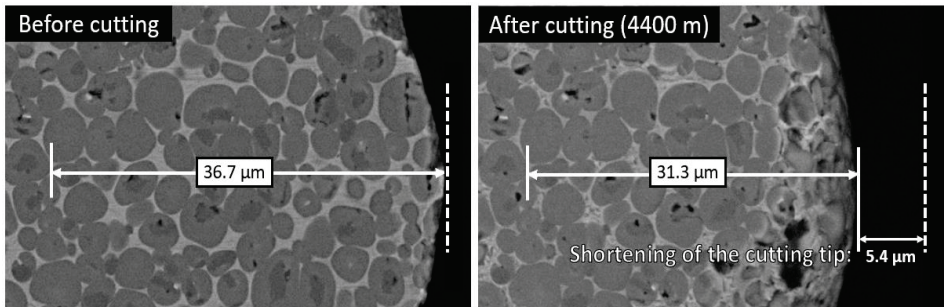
The measurement of the shortening of 70TiC-FeCr tool nose tip on the top surface of the cutting tool after cutting aluminium alloy (cutting distance 4400 m) (Publication V).
